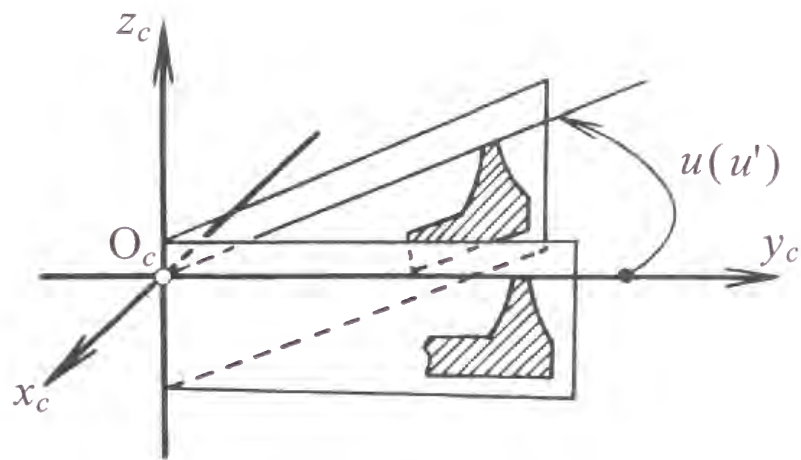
Shape of cutting edges of face-mill type of cutter in ring gear cutting
